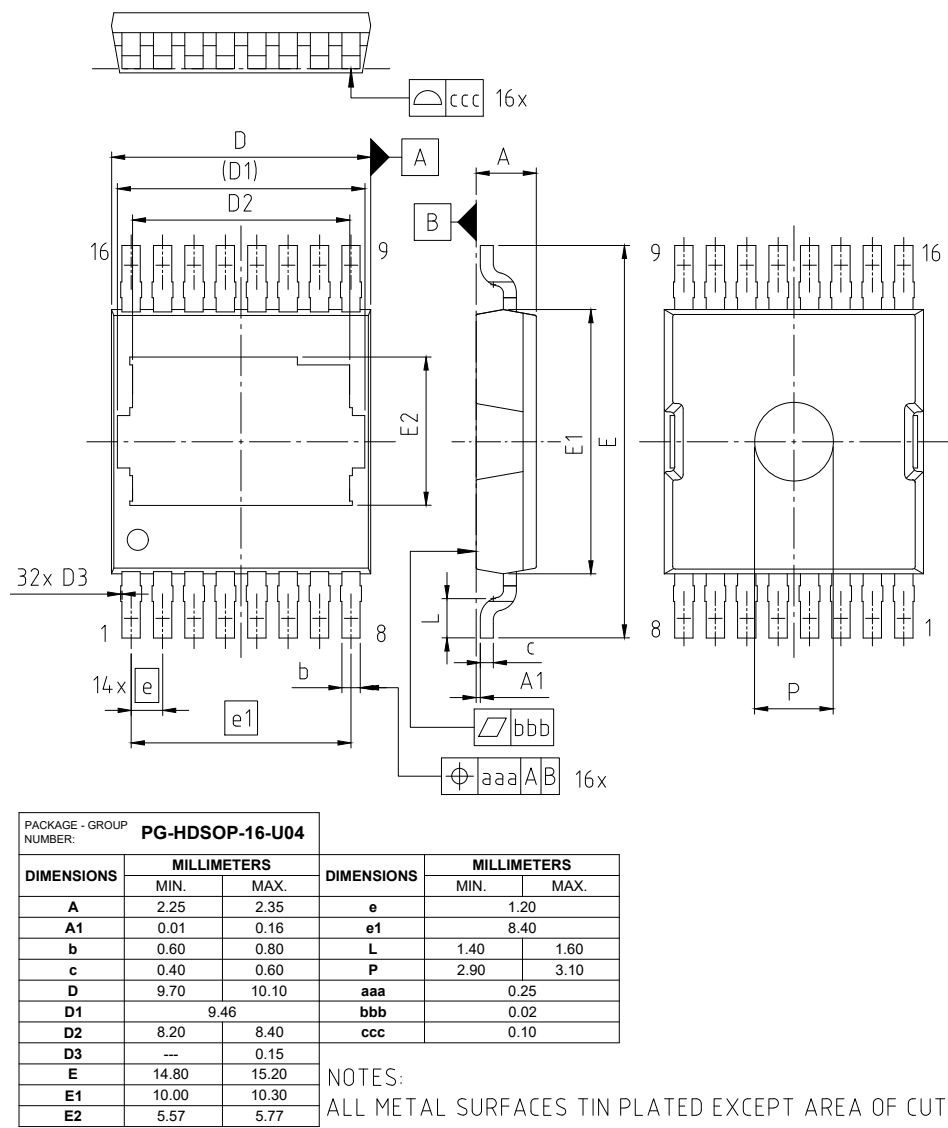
Outline PG-HDSOP-16, dimensions in mm
